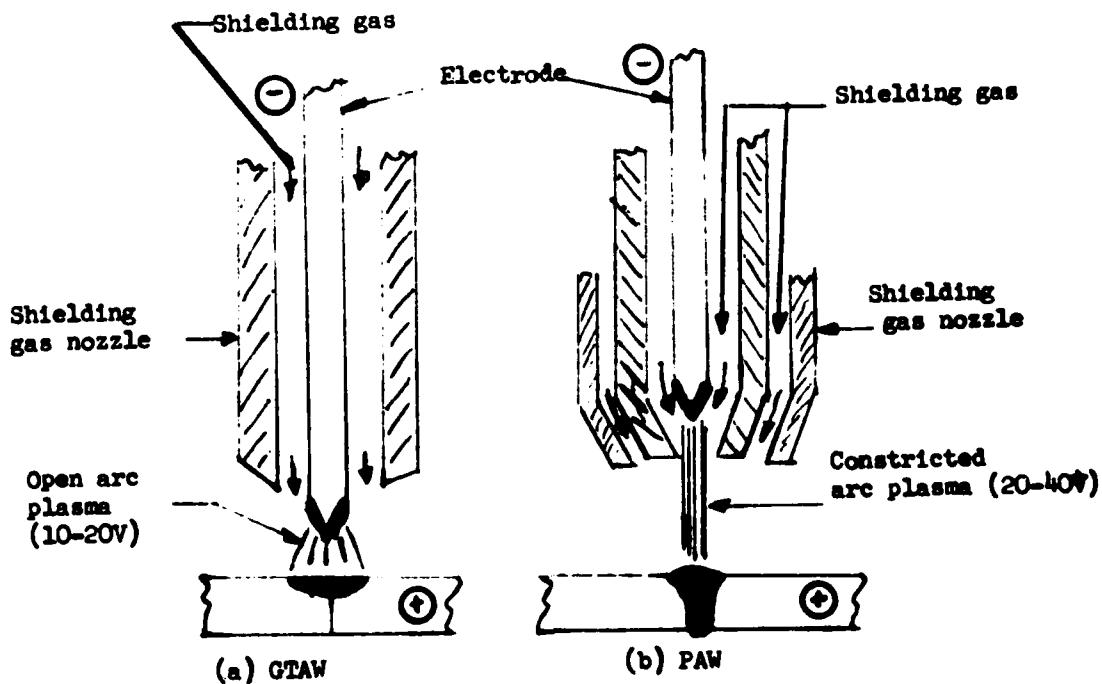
Schematic of arc welding processes. Note :- GMAW similar to GTAW except the consumable electrode is positive.
